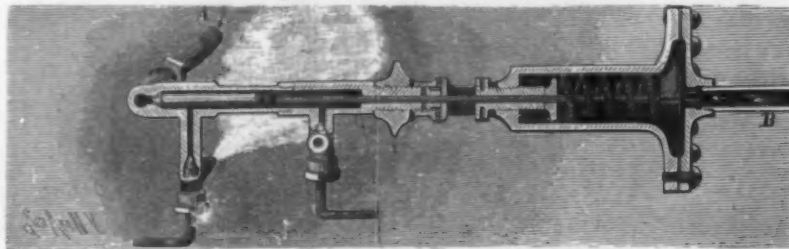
SECTIONAL VIEW OF AUTOMATIC REGULATOR.
